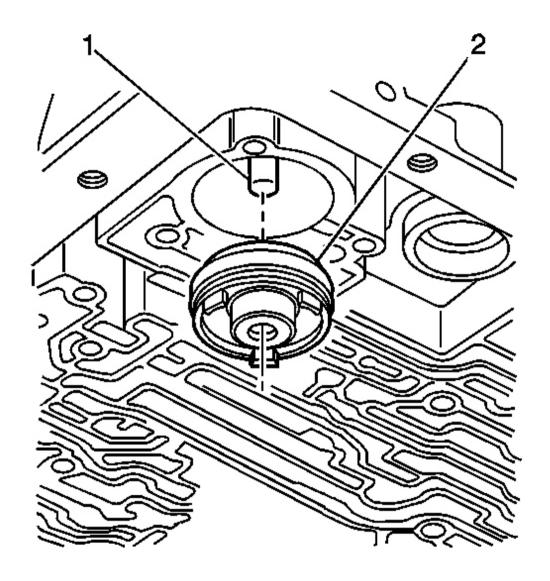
Identifying 3-4 Accumulator Piston Courtesy of GENERAL MOTORS CORP.
